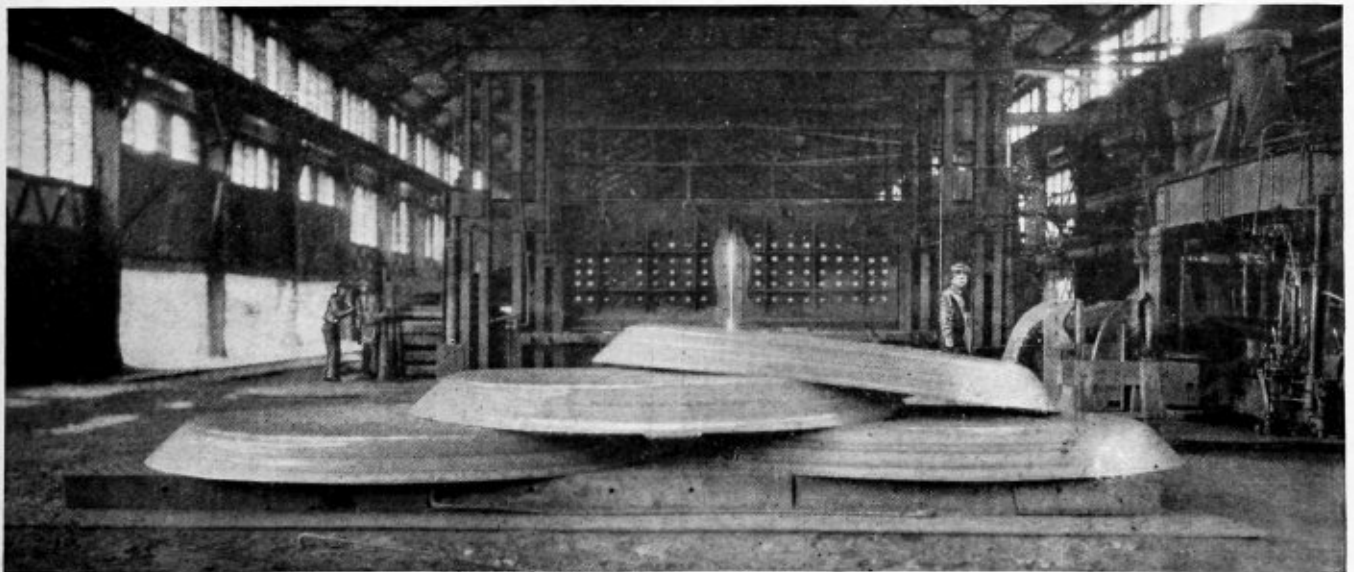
Flanged and Dished Heads, 108 Inches in Diameter, Piled on the Cooling Bed After the Breaking Down Operation and Ready for Re-heating
